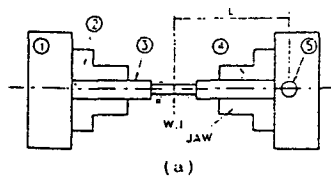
Schematic friction welding cycle(continuous drive brake type)
